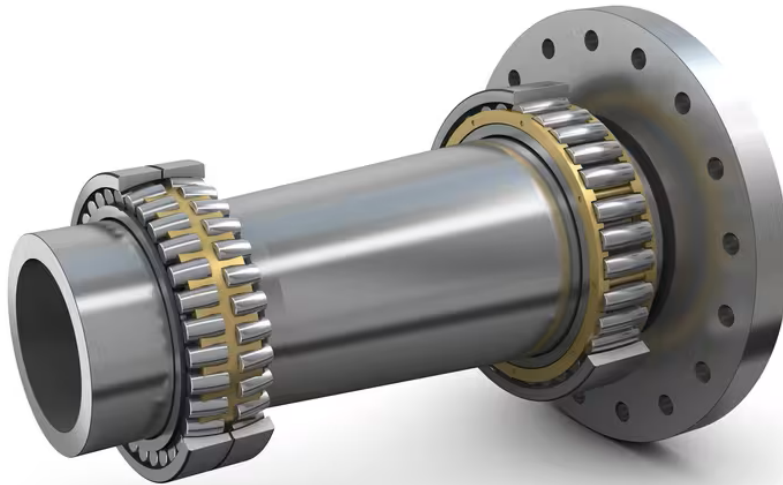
A wind turbine shaft with roller bearings mounted on it, www.skf.com
